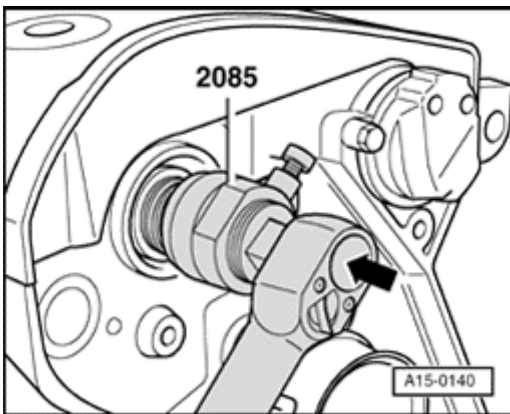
Positioning And Screwing Bolt Into Oil Seal As Far As Possible With Forced Pressure
